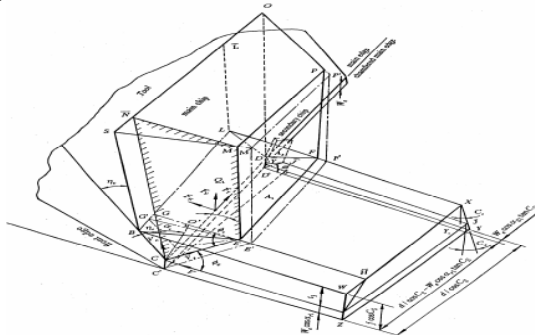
A force model of chamfered main cutting edge sharp tool ($R=0, f > R$)
